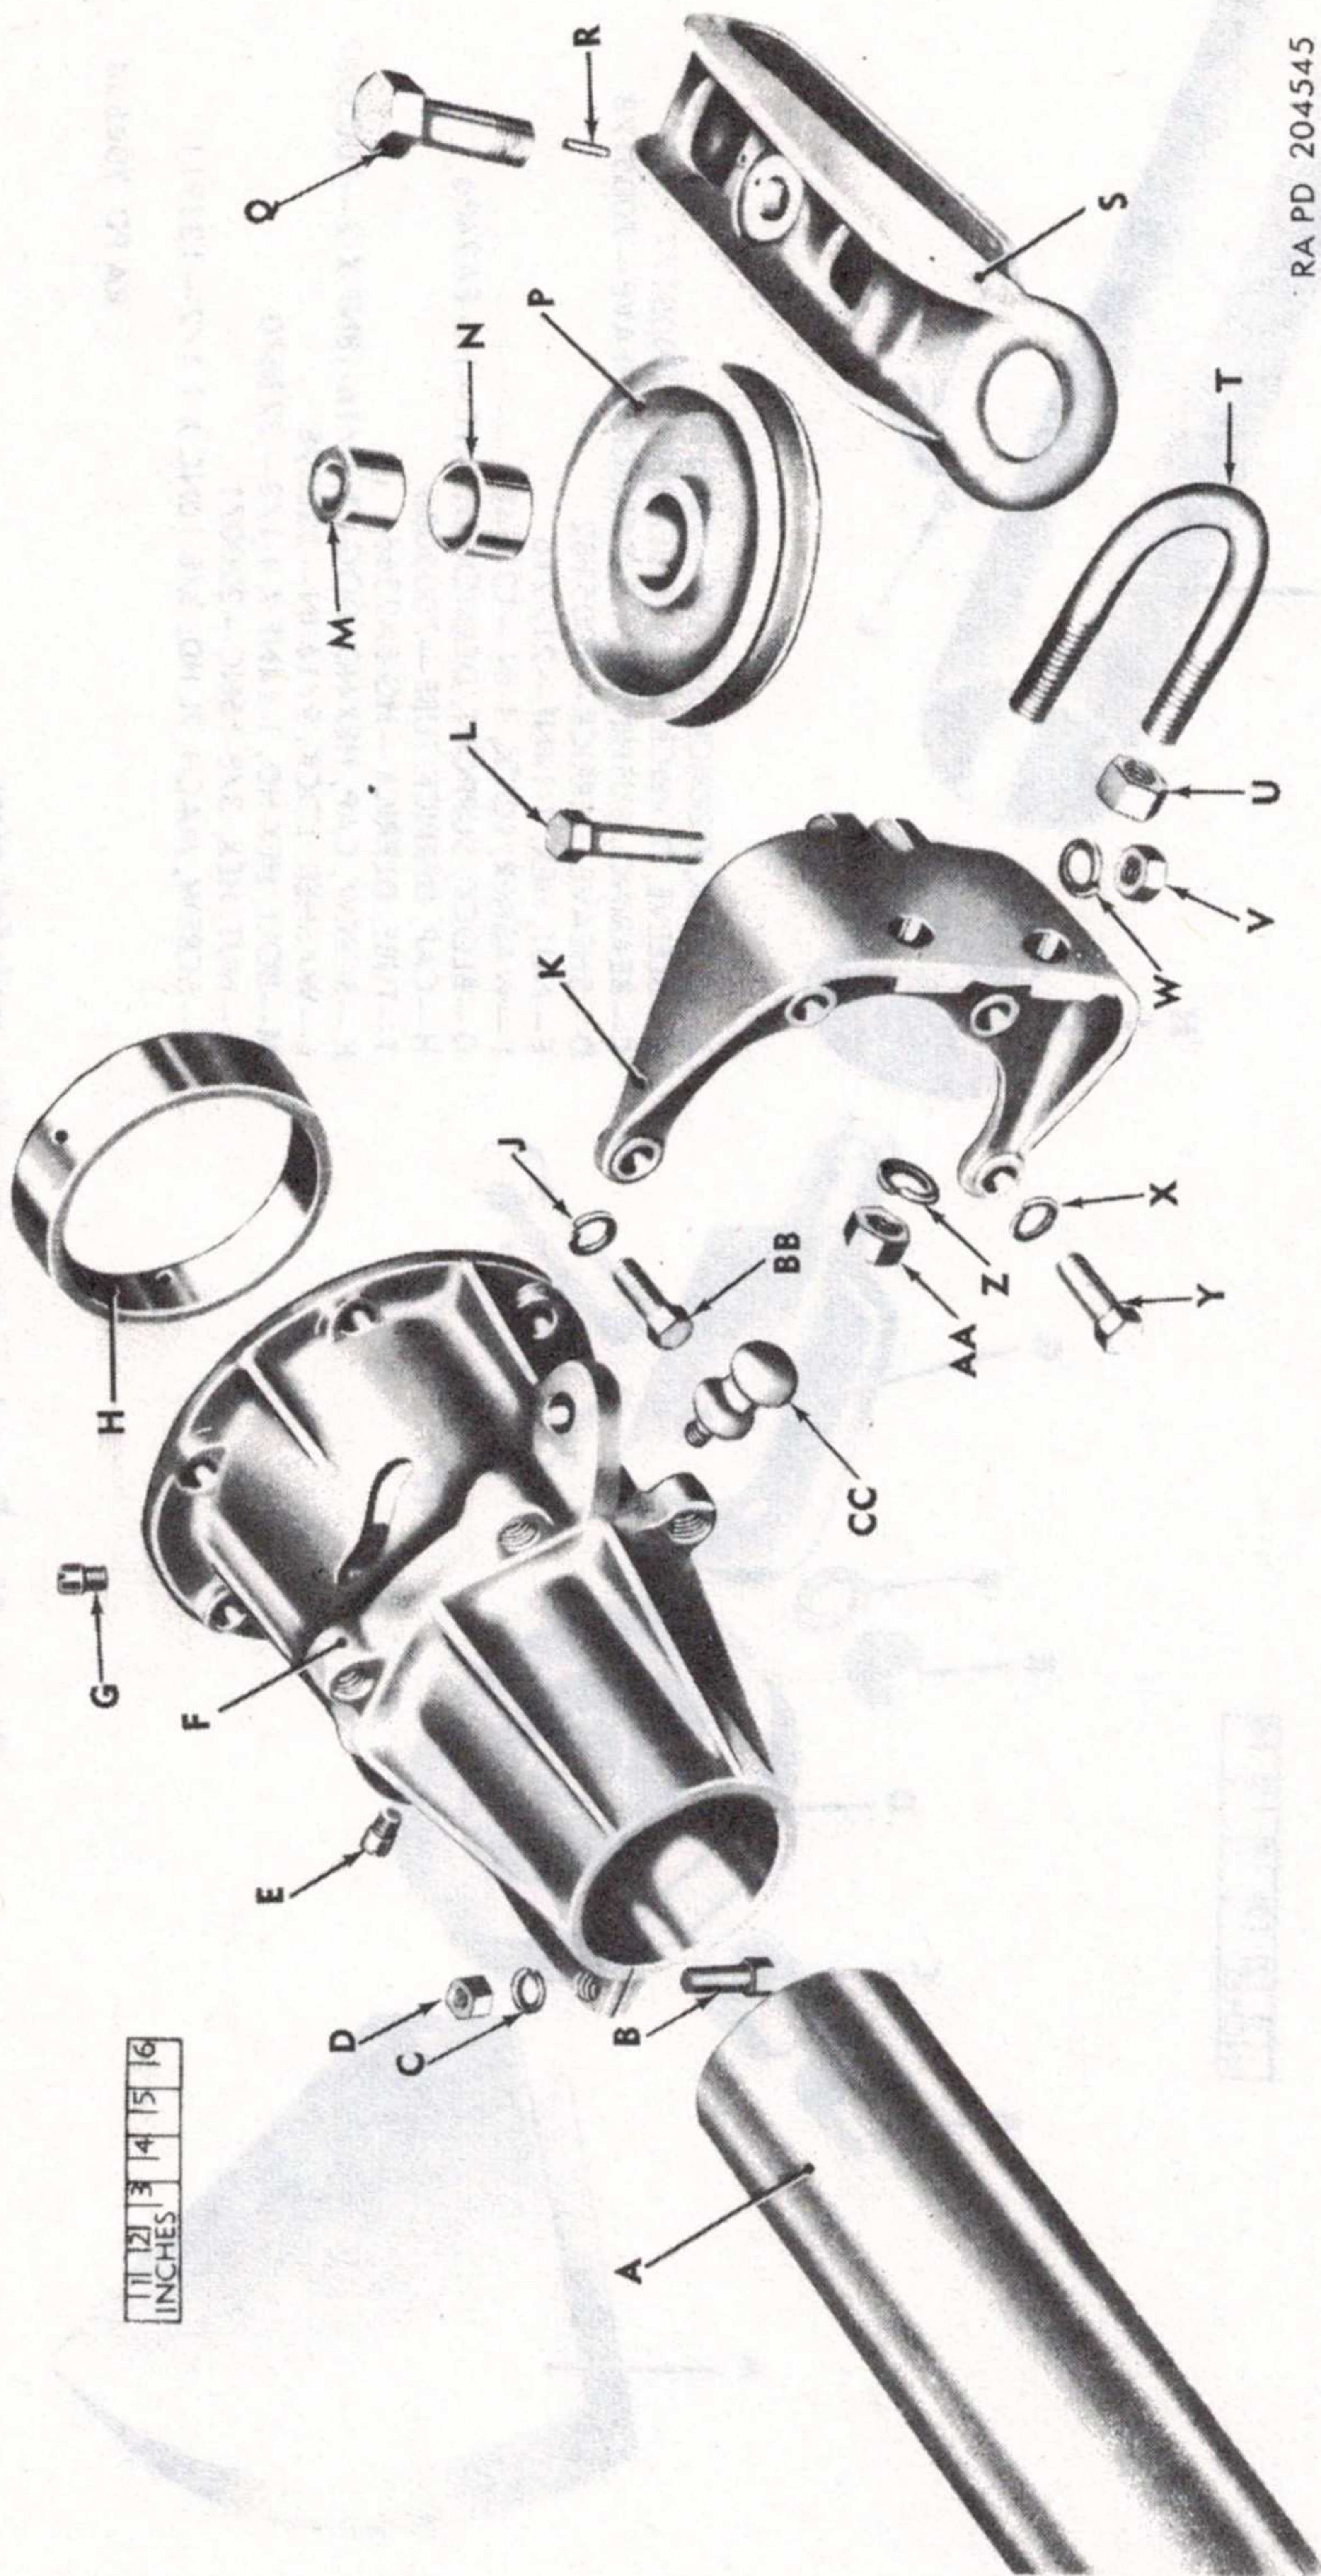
Derrick tube base and snatch sheave assemblies—exploded view.
